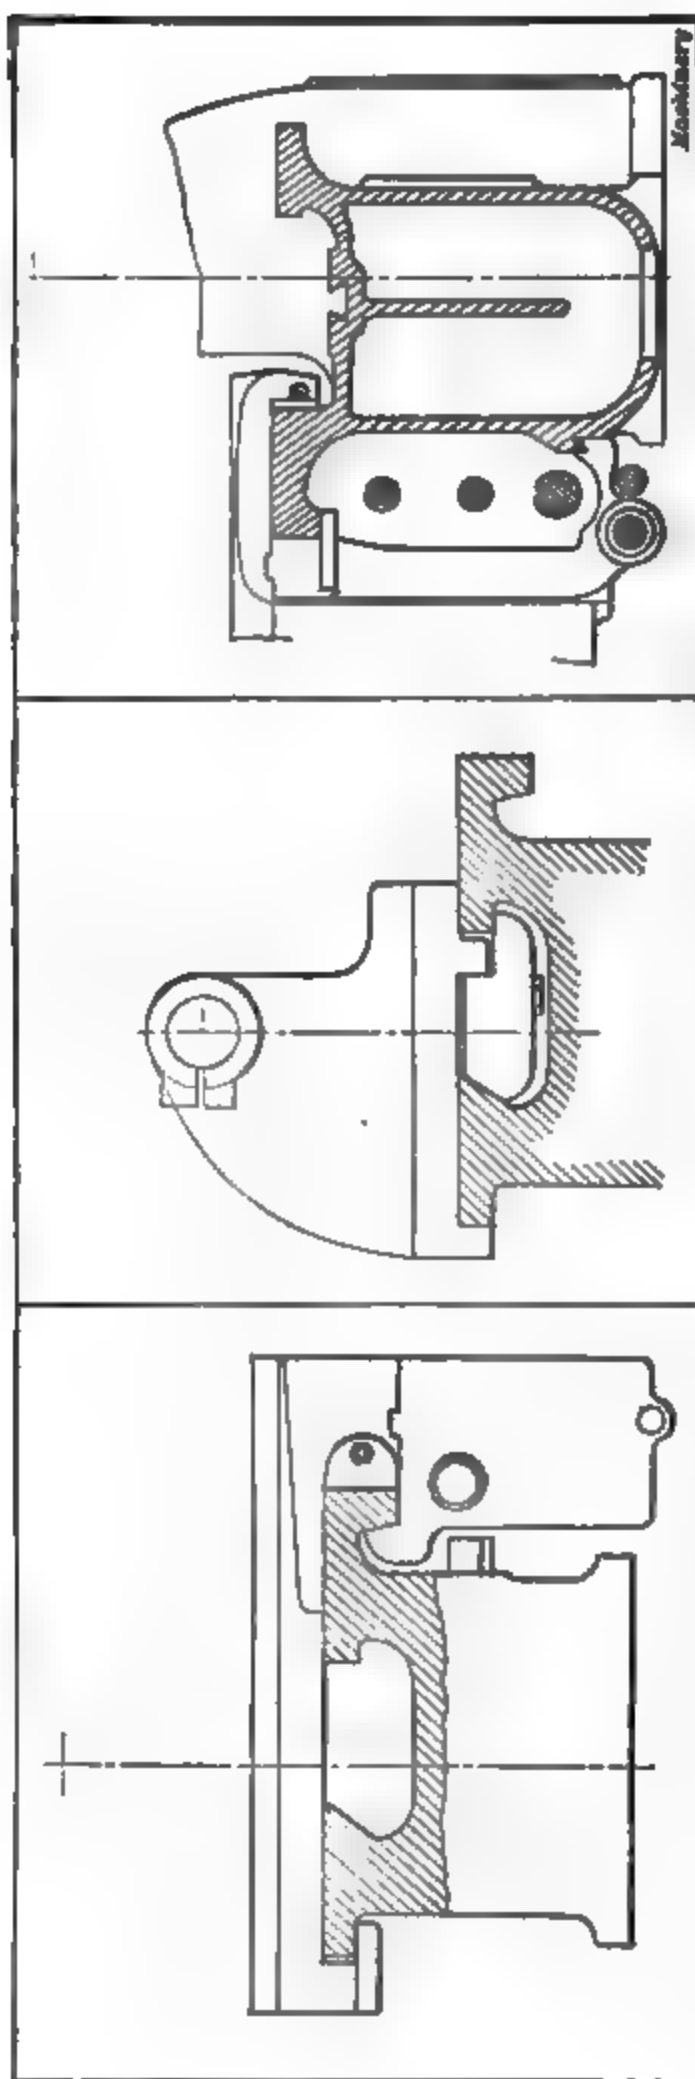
Lathe Bed with Inverted Hareer Guide, designed by Ward, Haggas & Smith, Kelghley, England
